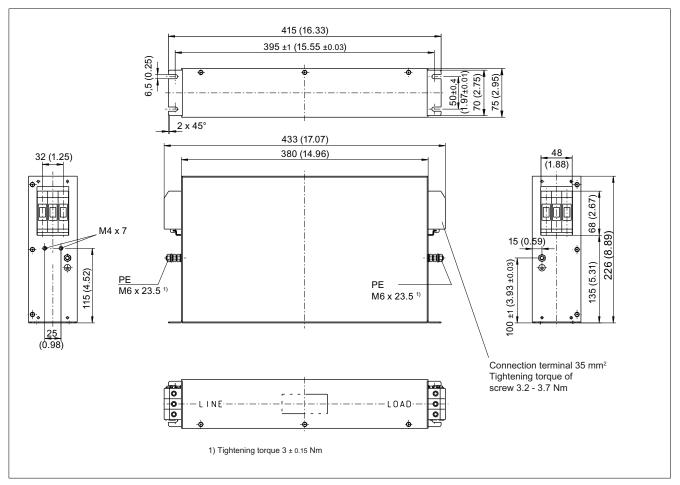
Dimension drawing of Basic Line Filter for Basic Line Modules 40 kW, order number 6SL3000-0BE23-6DA1, all dimensions in mm and (inches)
